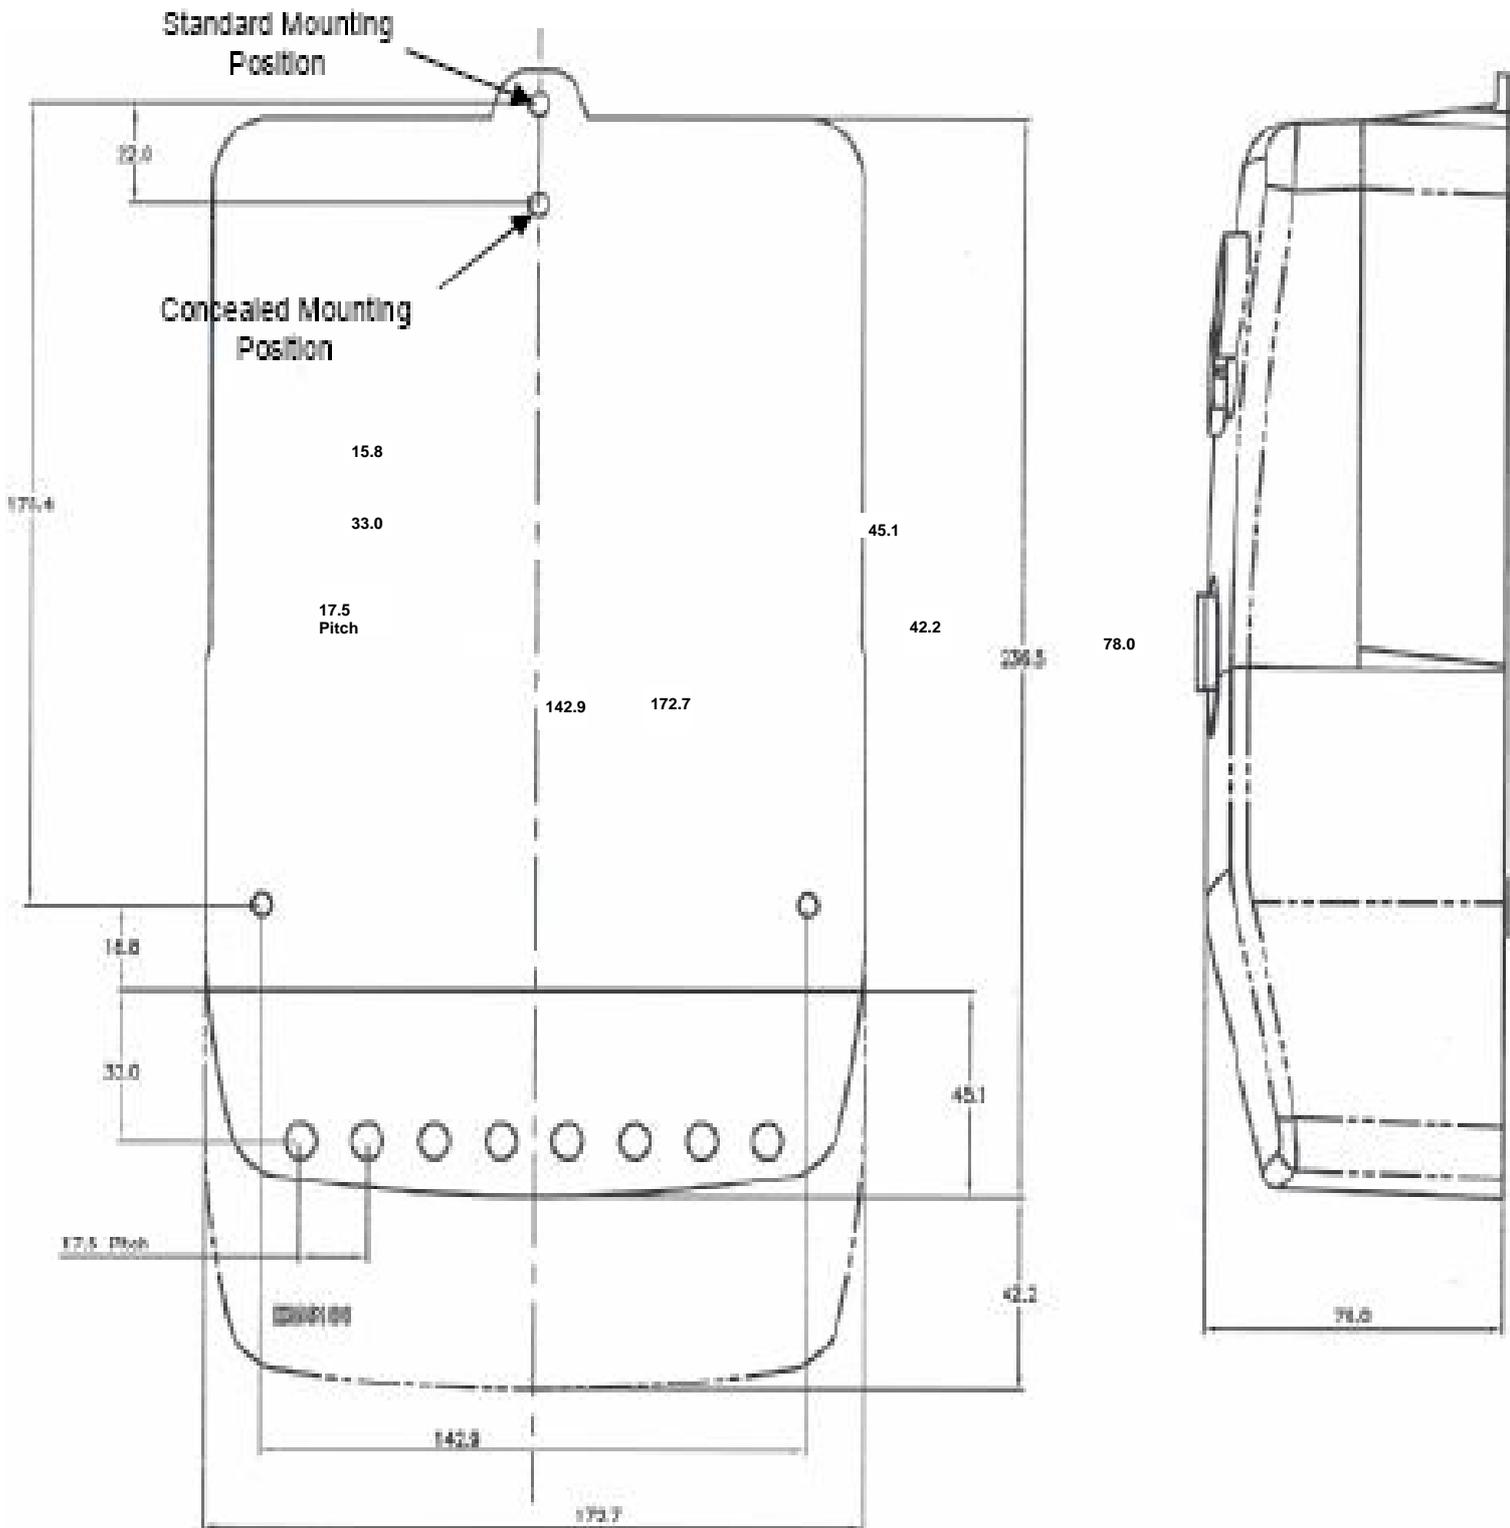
EM5100 meter dimensions and drilling positions (NOT TO SCALE)
